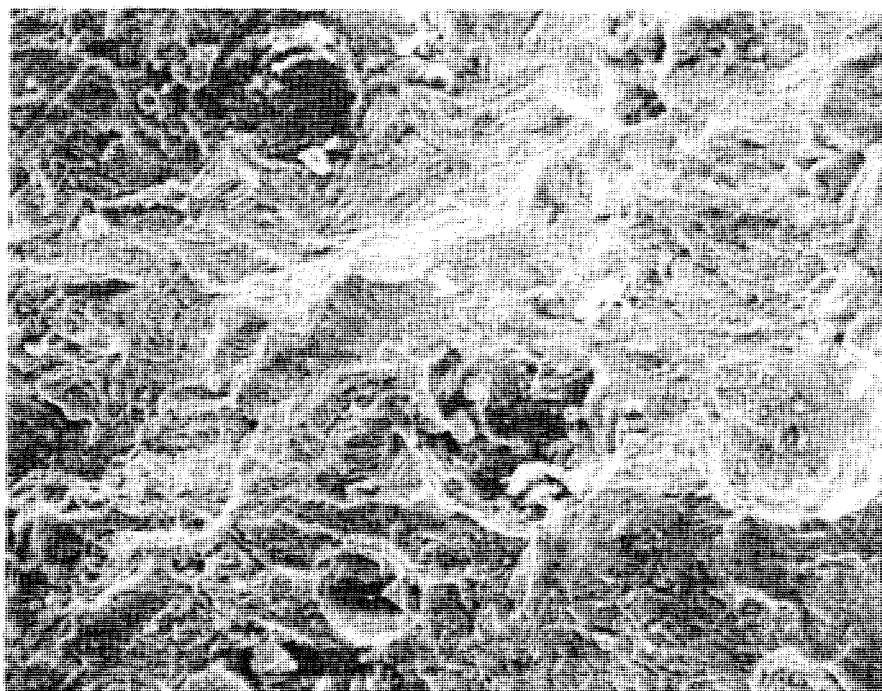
SEM showing representative morphology of a less corroded region of the fracture surfaces. Mag . 500x.
